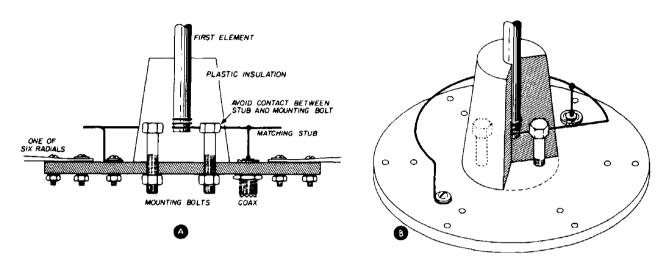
Detail of center insulator, bottom matching stub, and radial anchor plate, A. View B shows the assembly in perspective.
